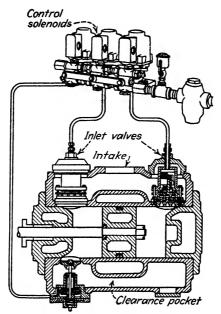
Solenoid-controlled inlet and clearance-pocket valves.
